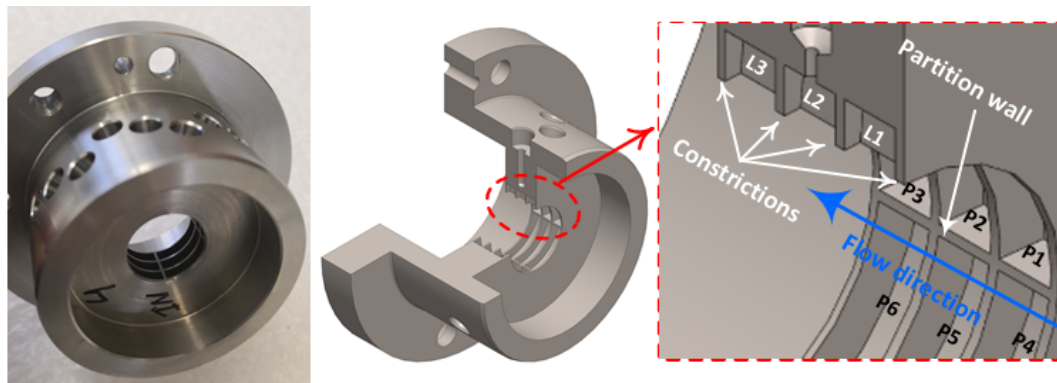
Photograph and cut-view of manufactured Pocket Damper Seal (PDS) used for testing
